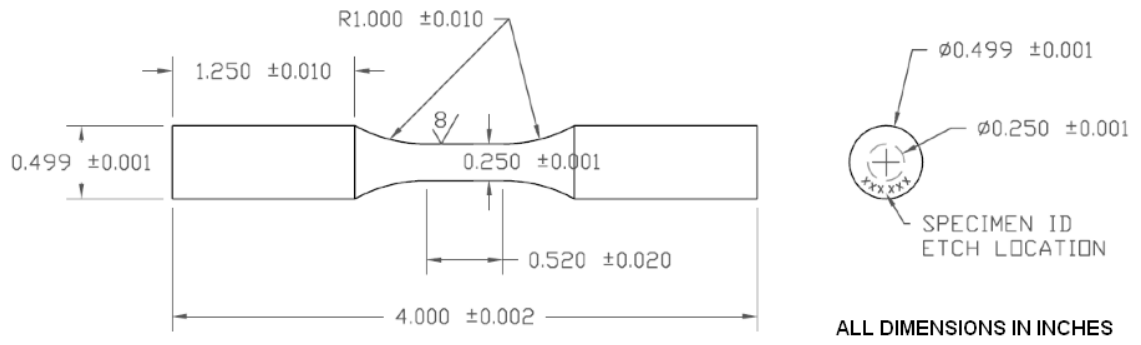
Drawing of Solid Cylindrical Specimens Used for Previous Testing [14]
